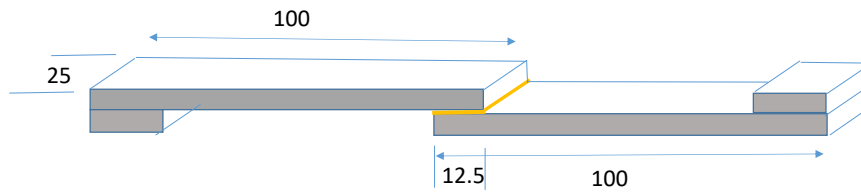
Single lap shear (SLS) specimen geometry (dimensions in mm).
